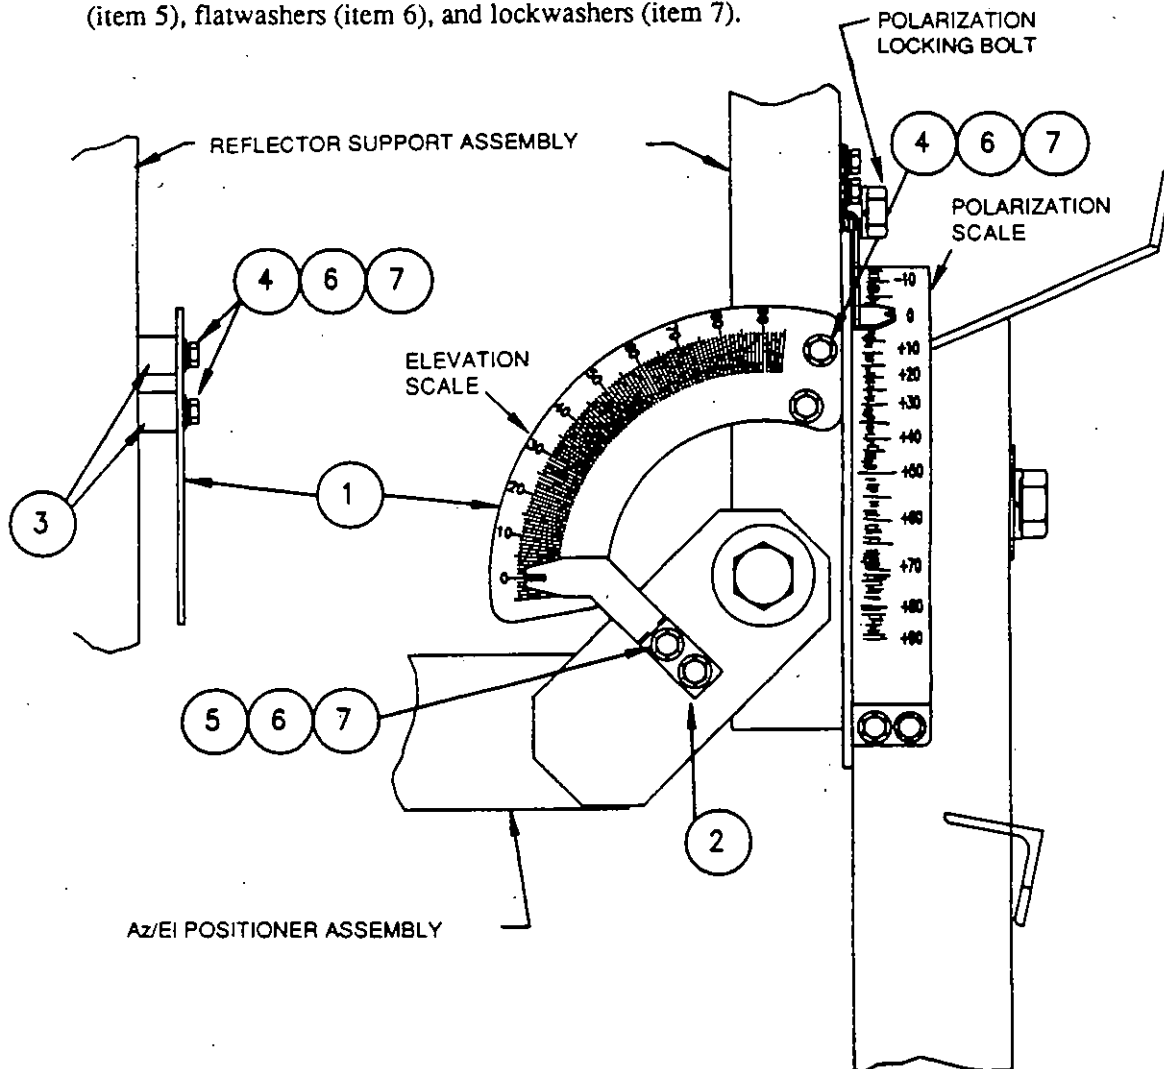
Mating Az/EI Positioner Assembly to Reflector Support Assembly
